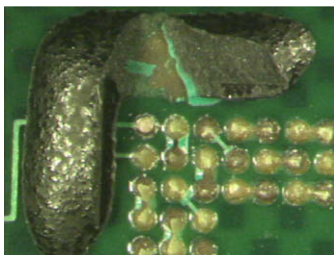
Fractured thermally cured epoxy edge bond after component fell off in testing.
